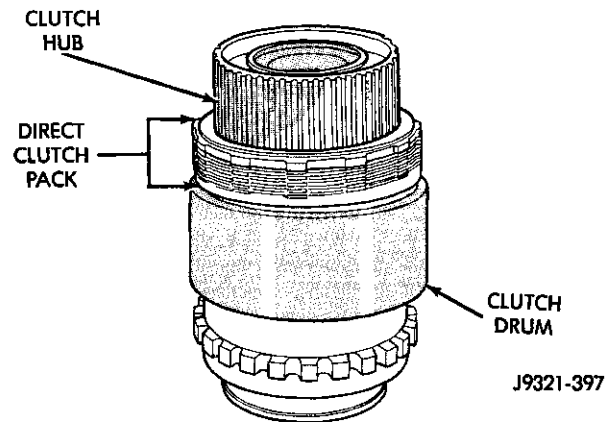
Direct Clutch Pack And Clutch Hub Installation
